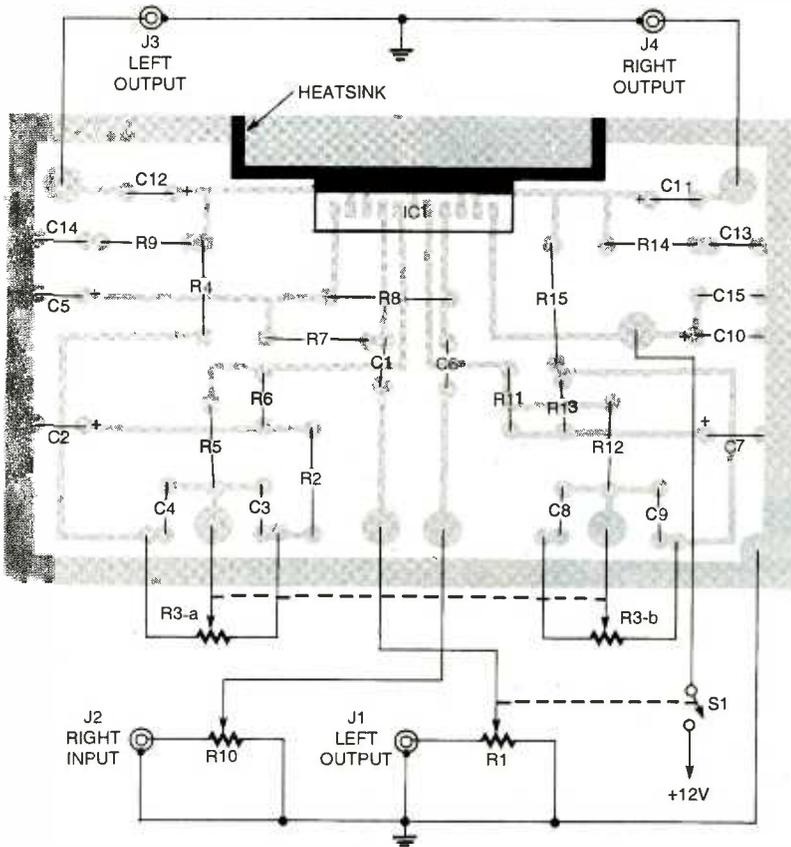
Assemble the Portable CD Amp guided by this parts-placement diagram. Since the LM2877 is mounted directly to the board, be careful the chip is properly oriented before soldering it into place; when soldering the IC to the circuit board, be extra careful not to overheat the leads of the component, as overheating the leads can cause damage to the chip.
